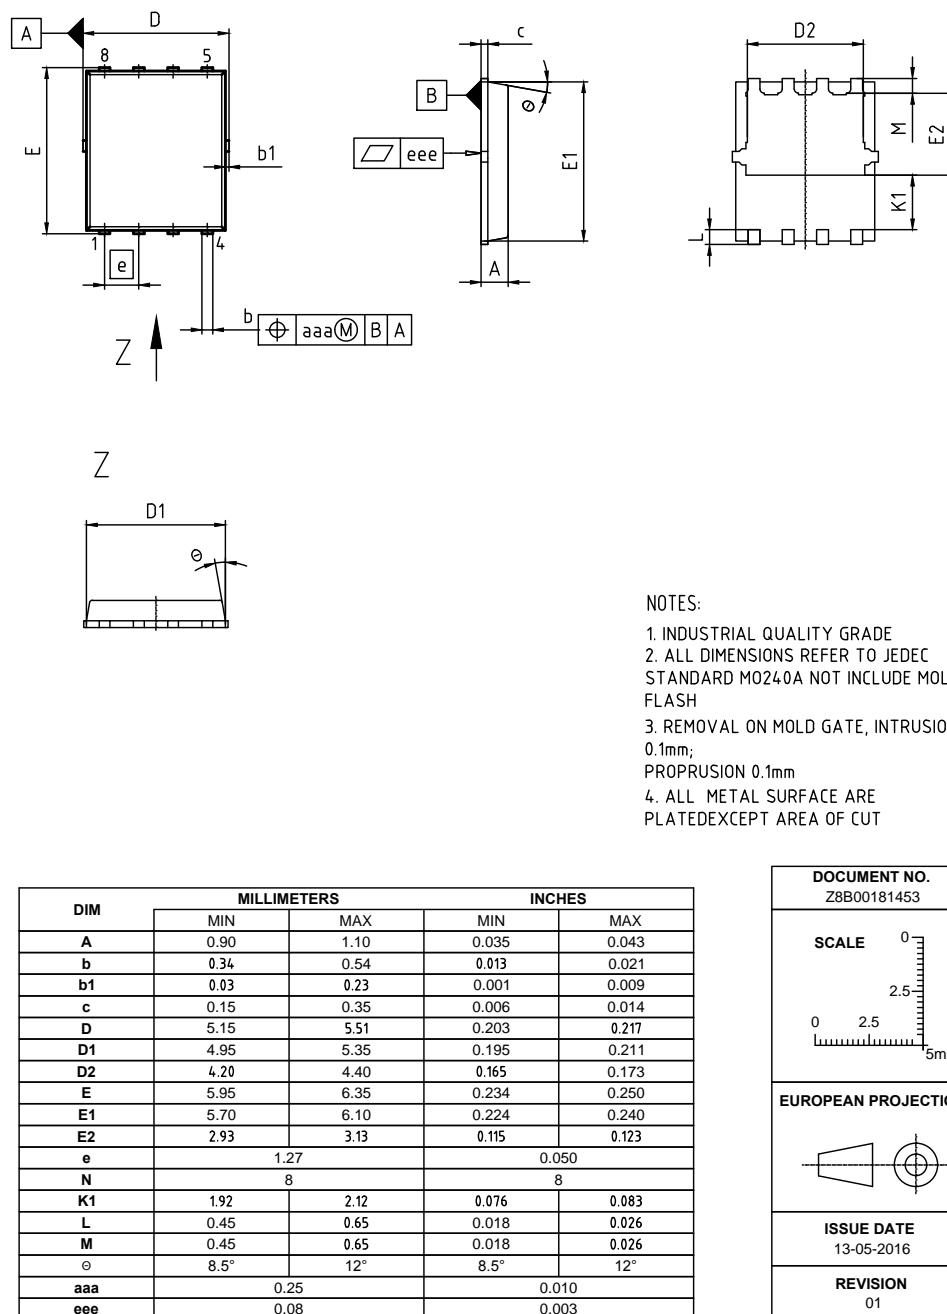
Outline ThinPAK 5x6 SMD, dimensions in mm/inches
